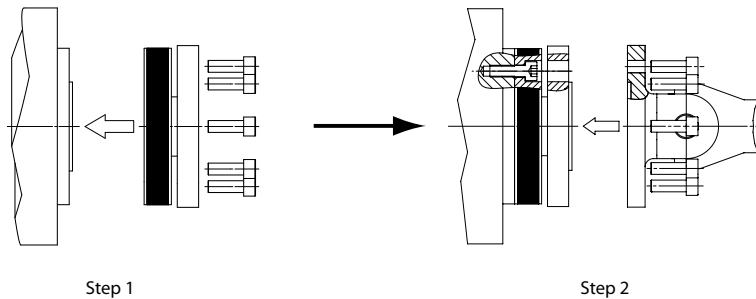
Example 1 mounting of TF 213 to TF 219 Sensors
